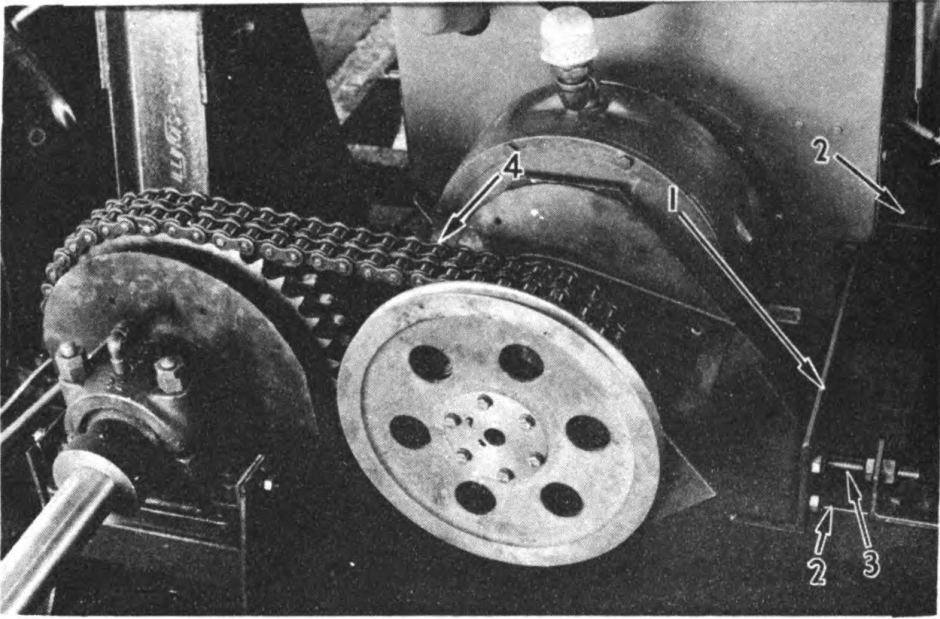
DRYER MAIN DRIVE CHAIN WITH CHAIN GUARD REMOVED.
